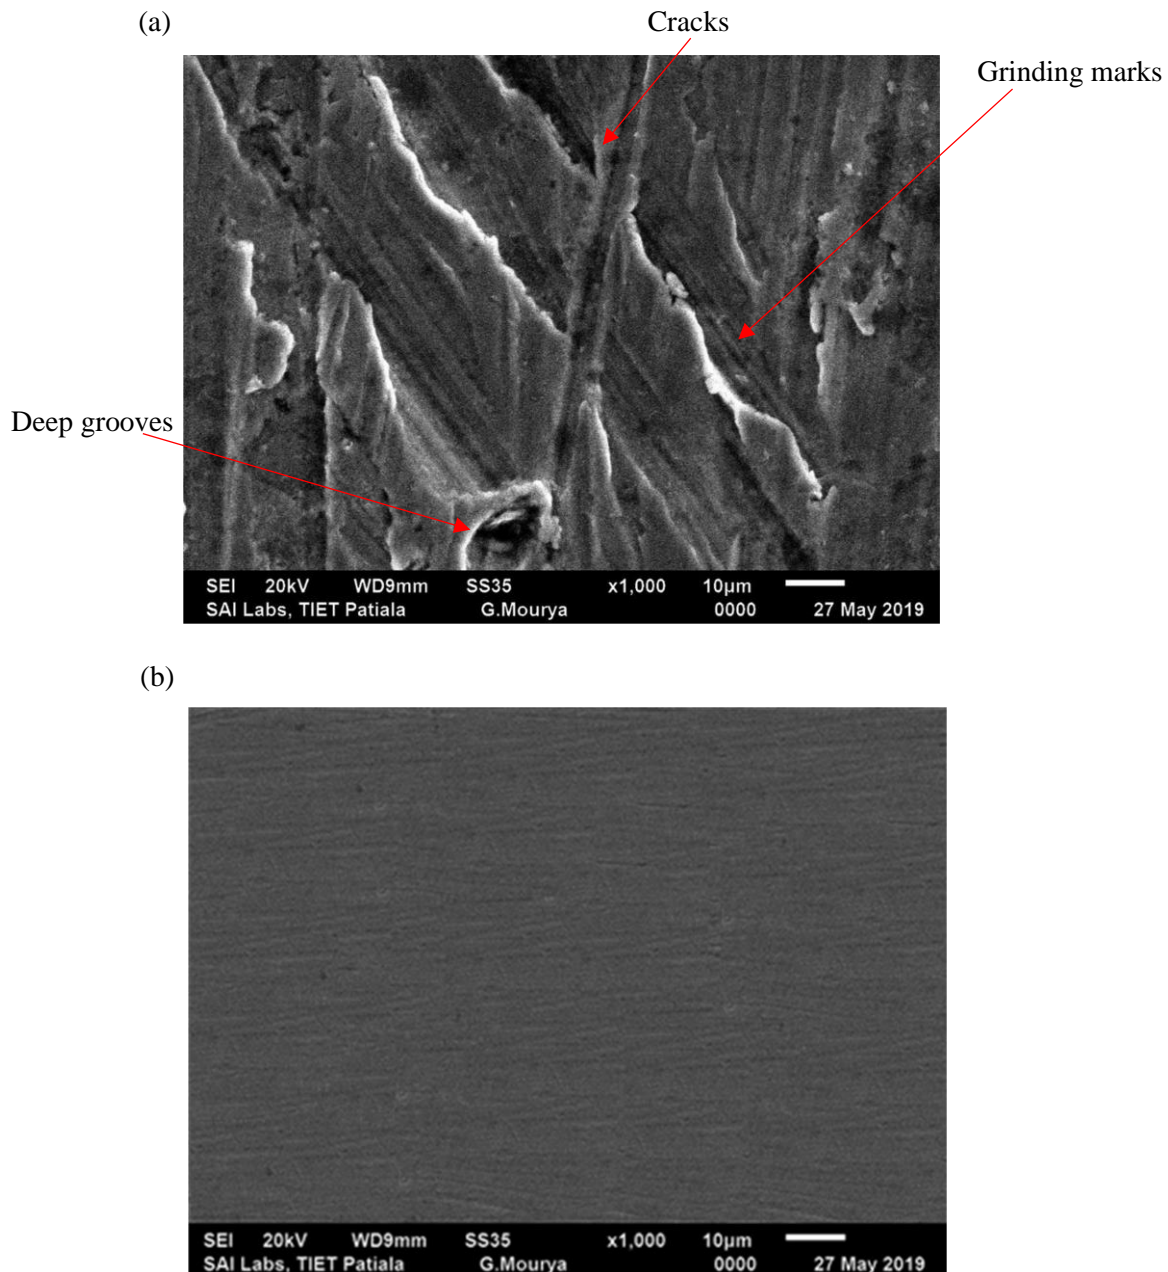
The scanning electron microscopy image of the inside surface of the cast-iron cylindrical workpiece mold (a) initial ground surface and (b) final MR-finished surface in 40 min of finishing with the optimized parameters of the R-MRH process.
